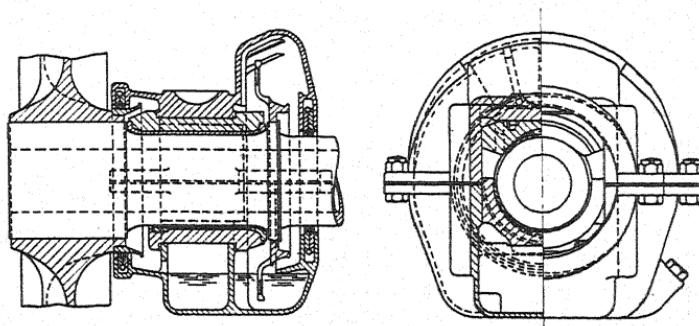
Inner Bearing for Locomotive Axle (Peyinghaus)
